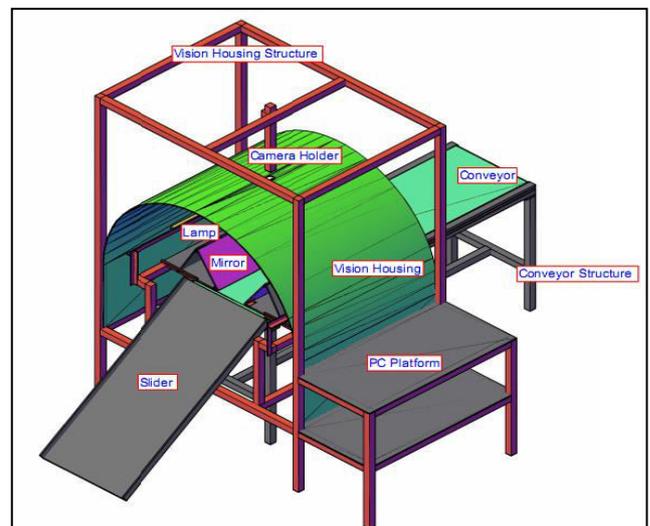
The 3D drawing of the star fruit inspection system.
